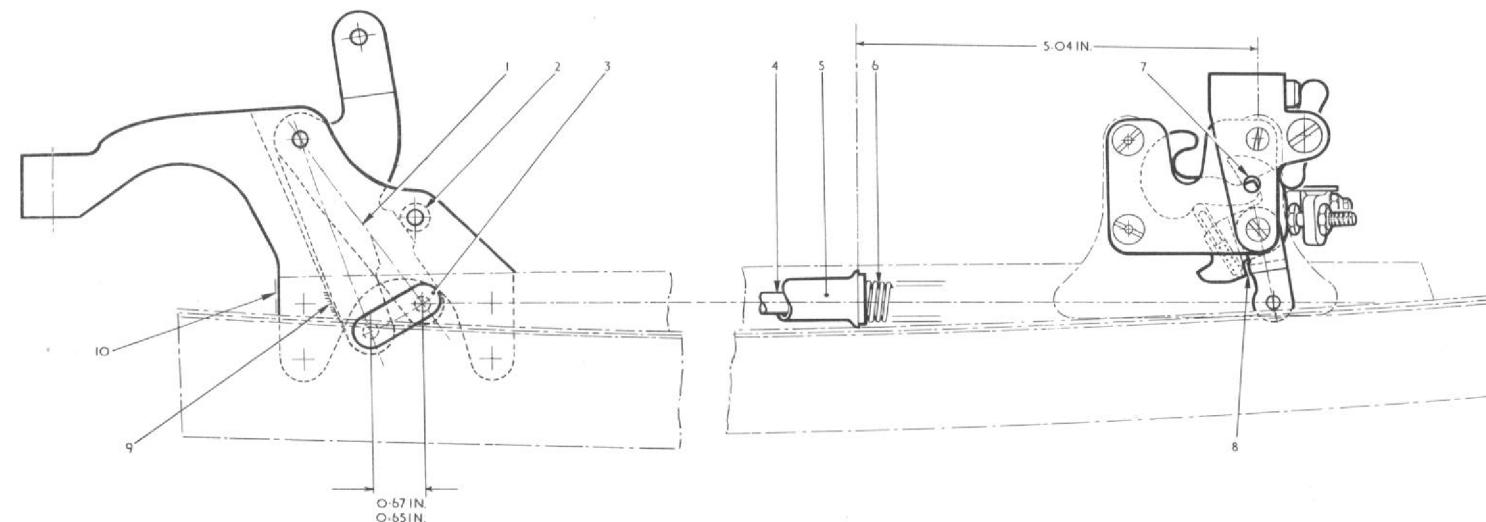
Adjustment of nose wheel door lock mechanism and microswitch
